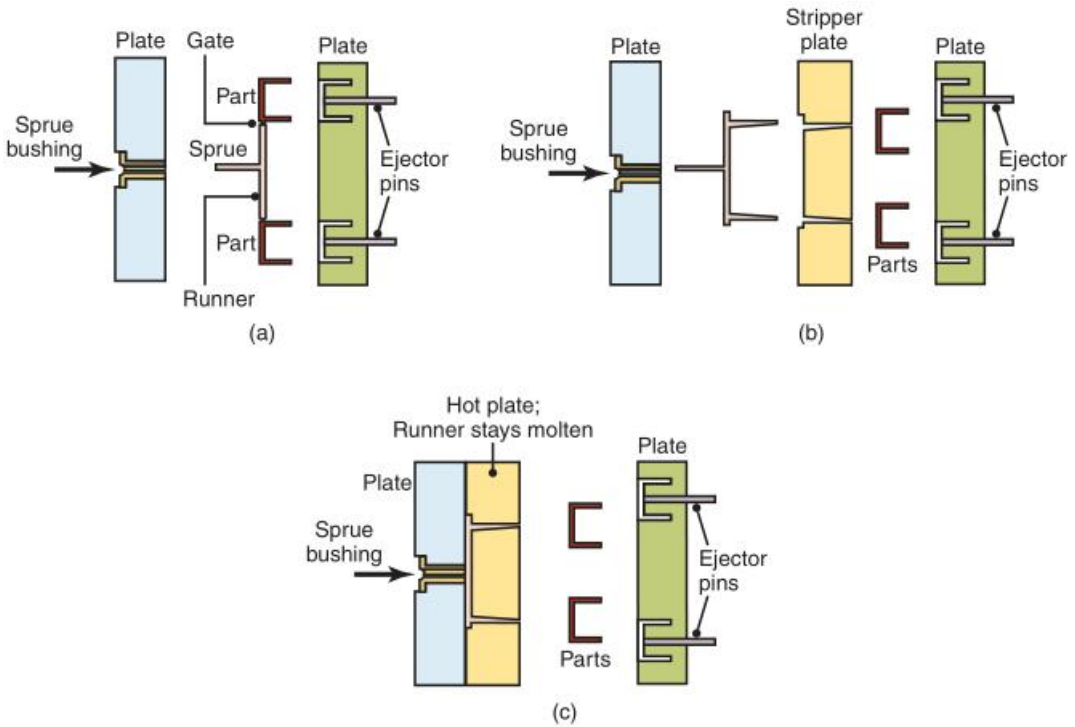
Types of molds used in injection molding: (a) two-plate mold; (b) three-plate mold; and (c) hot-runner mold.
